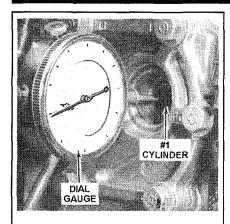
Install a dial indicator into the No. 1 cylinder opening
